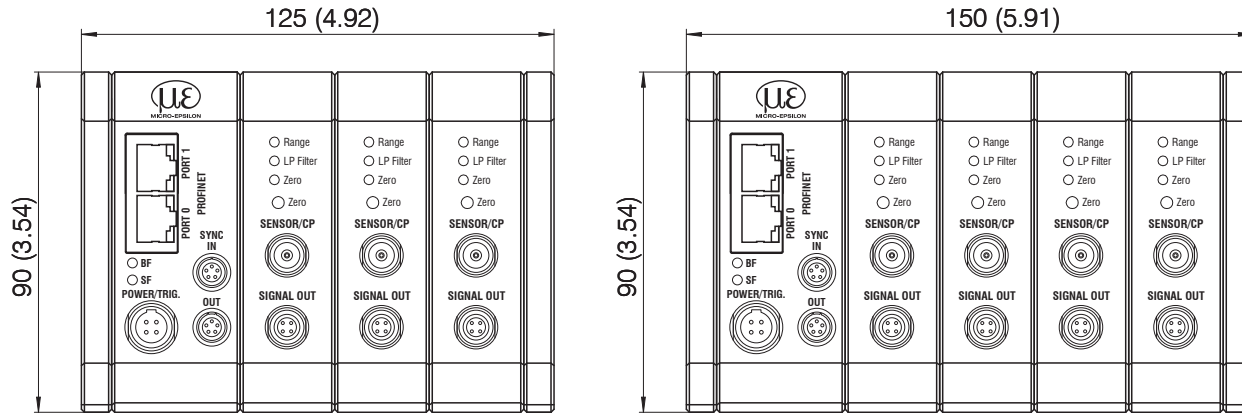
Dimensional drawing of controller with three or four demodulator modules
